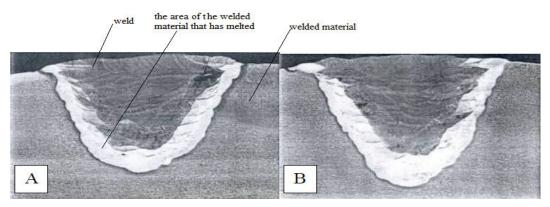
Macrostructure of weld No. 2 - cross-section A and B
